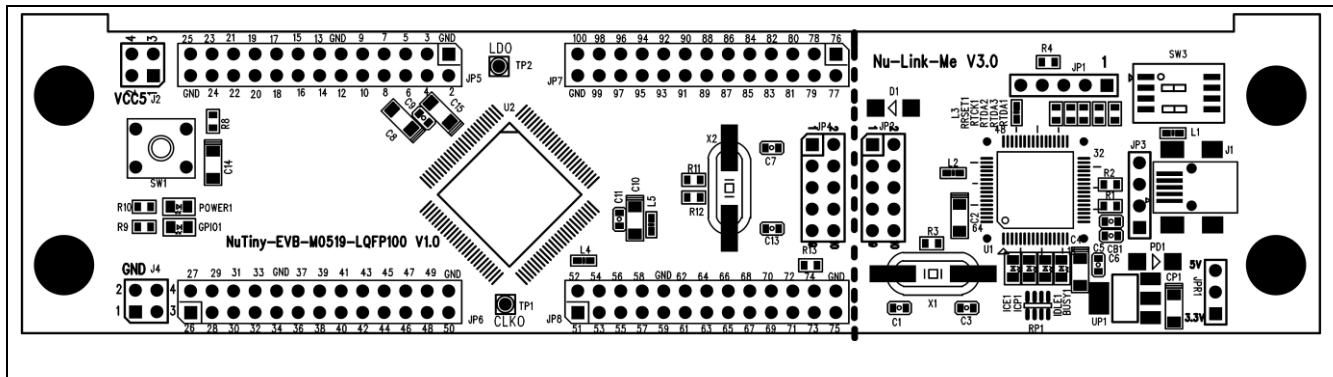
NuTiny-SDK-M0519 PCB Placement
